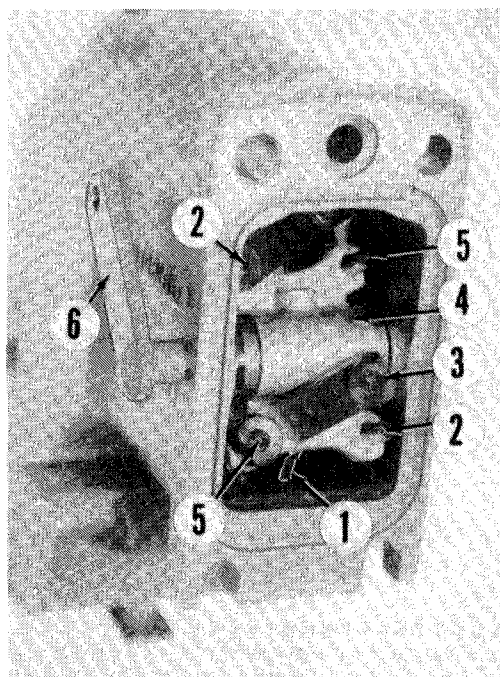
Before removing SCV rocker (4), note which side of housing the operating arm (6) is located on to ensure correct reassembly.
